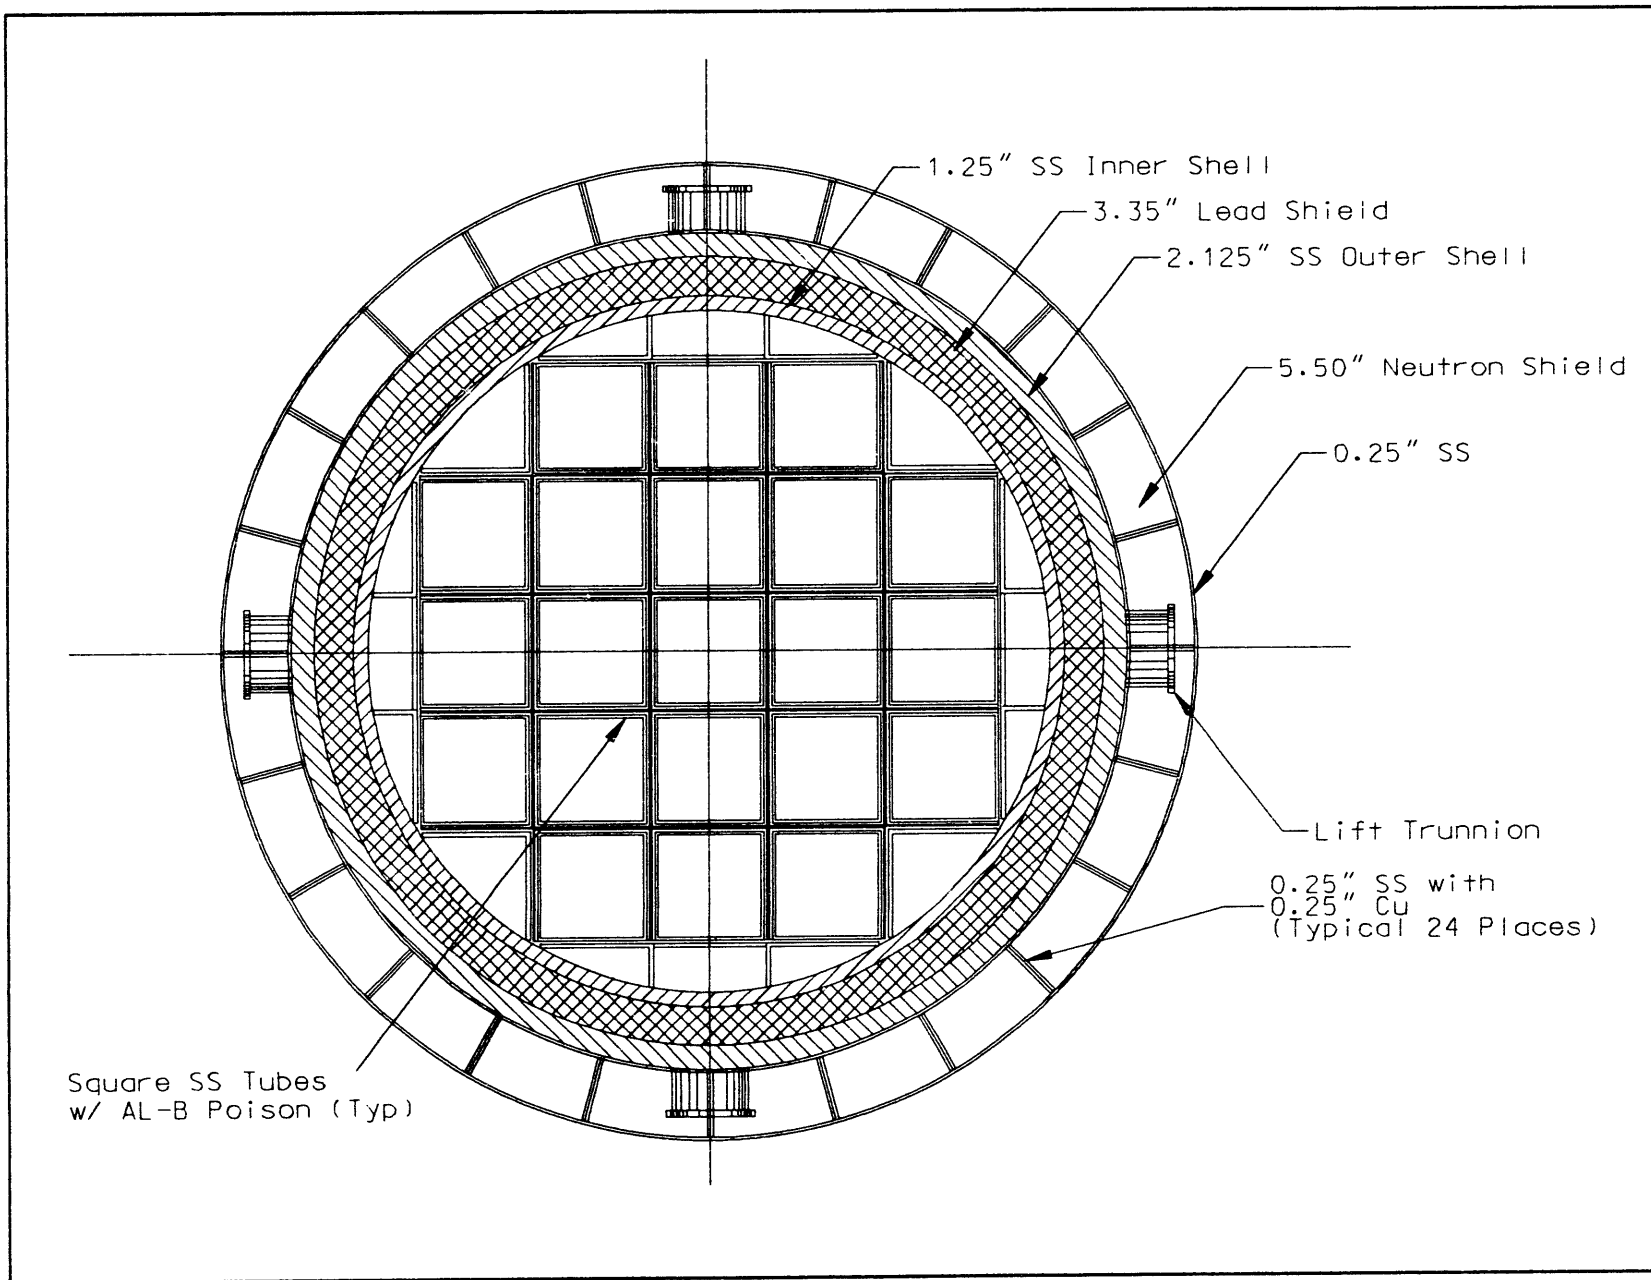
100-Ton TSC Metal Cask For 21 PWR Fuel Assemblies (End Section View)
